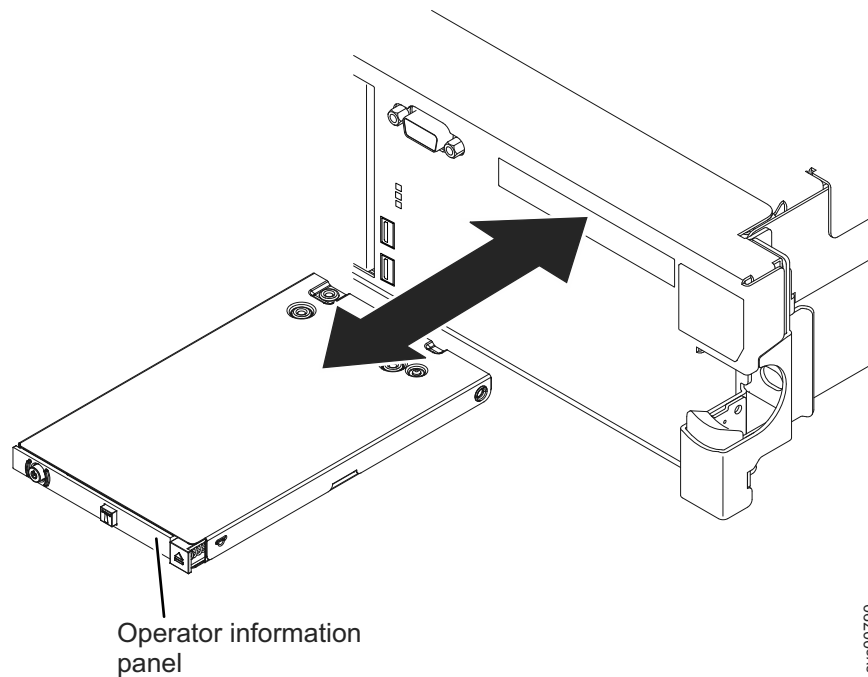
Removing the 2145-DH8 operator-information panel assembly
